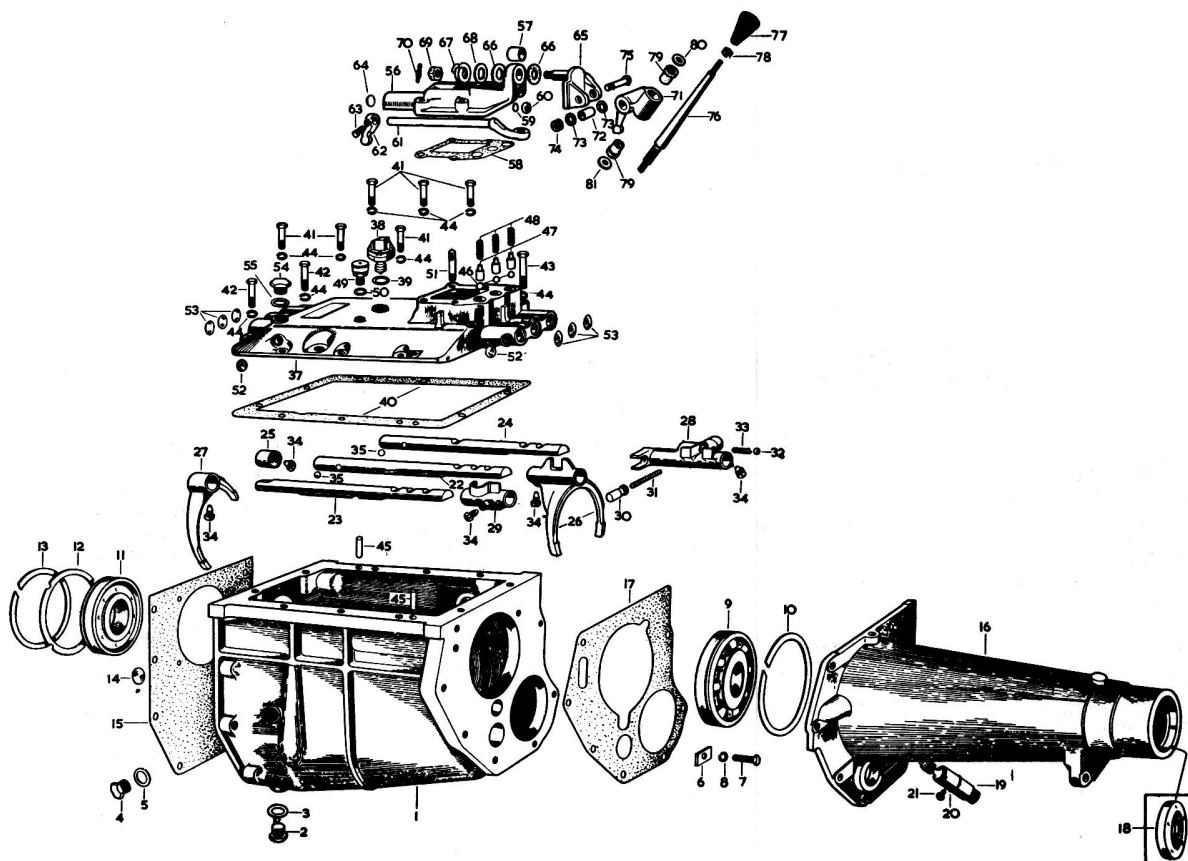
THE GB GEARBOX AND TOP COVER
